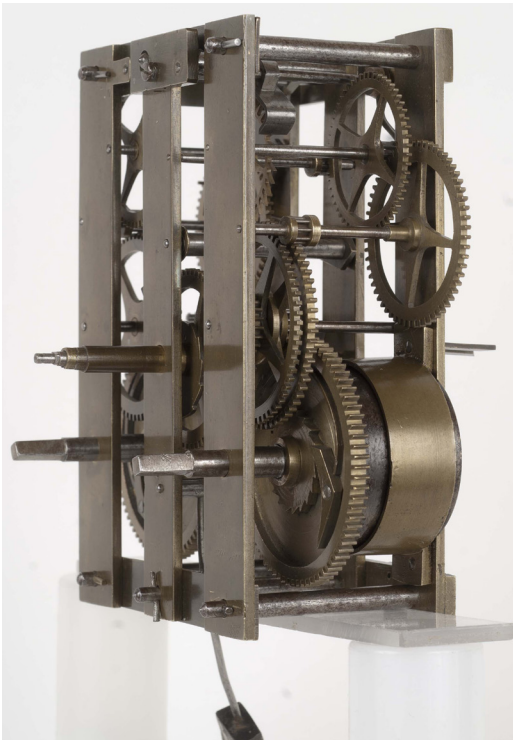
A $\frac{3}{4}$ right front movement view showing the front strip plate assembly and most of the going train wheels including the intermediate wheel assembly just in front of the going 2nd wheel.
